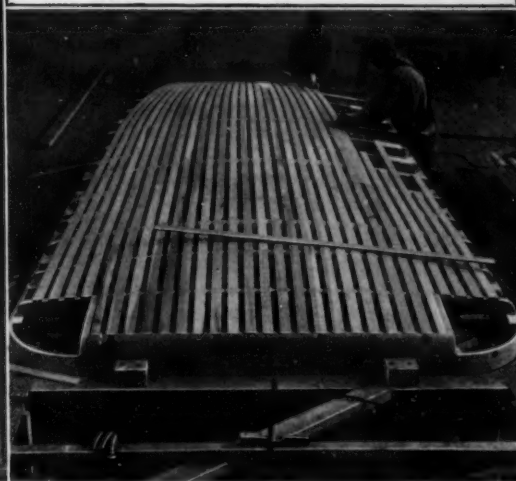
ROOF-SECTIONS OF STANDARD BODY AND METHOD OF BUILDING SPECIAL HIGH-CROWNED ROOF
